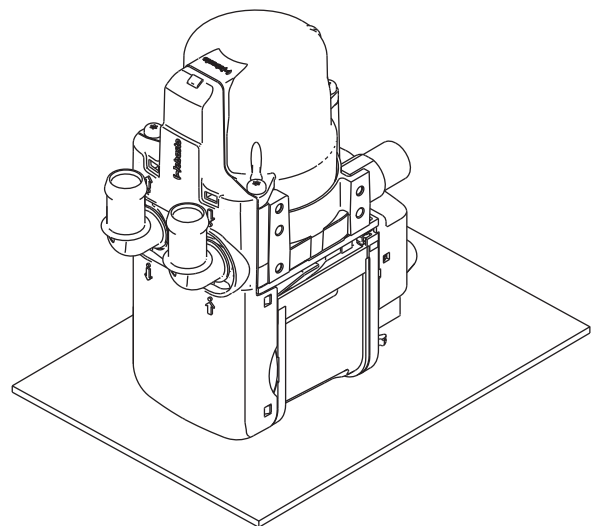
Preferred position for Thermo Top Evo heater for storage and transport
